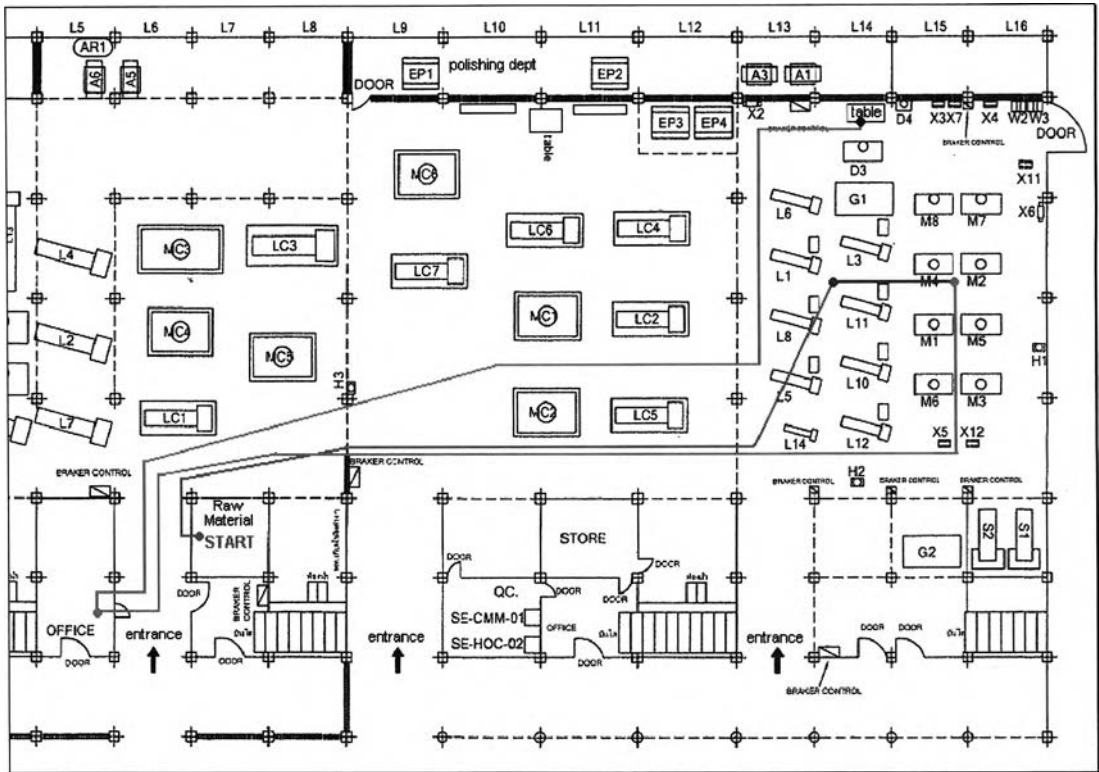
B – Inner hex holder string diagram (part 2 of 2, handle) for the original design
